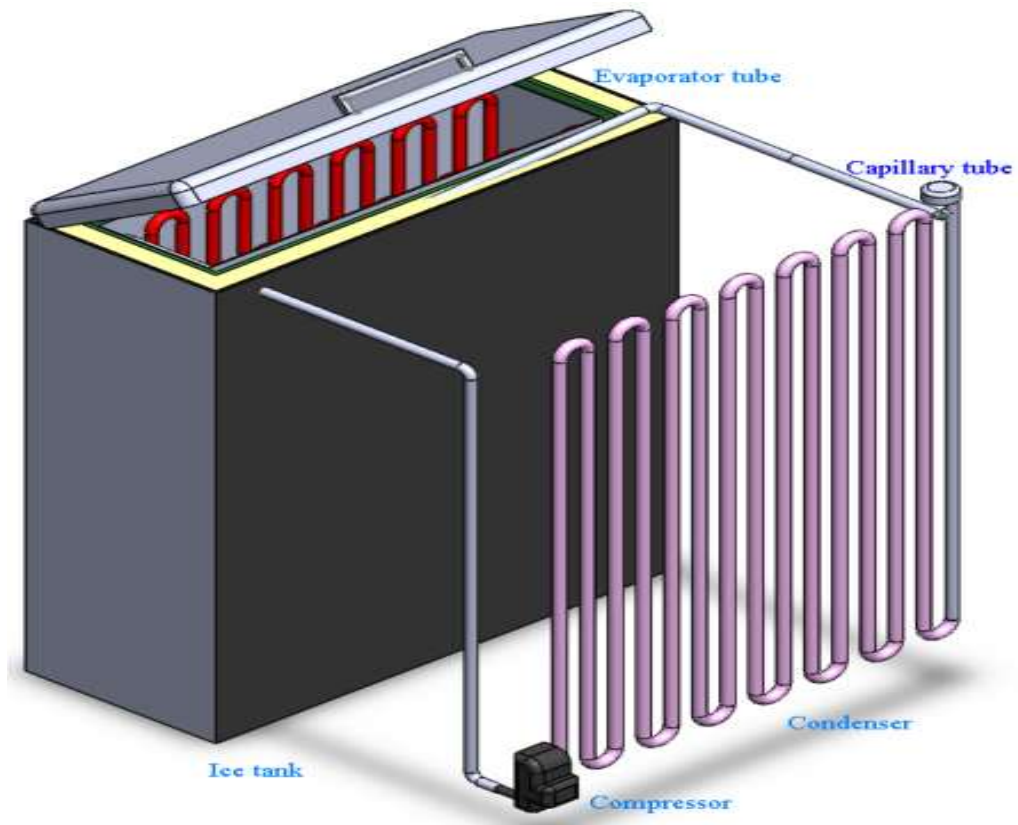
3D drawing of slab ice storage tank with refrigerator components
